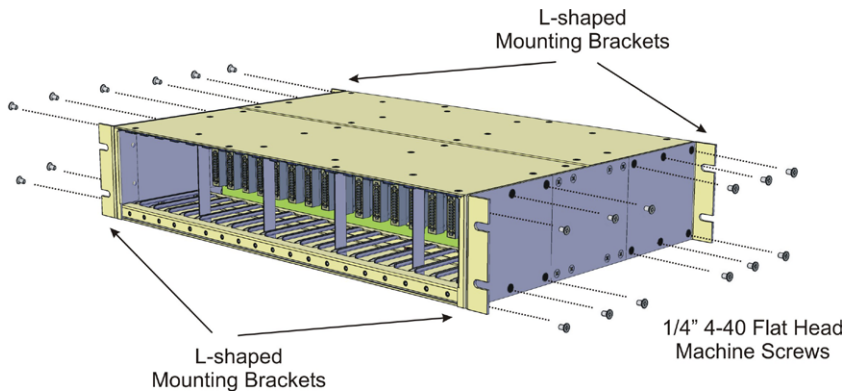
Installation of Mounting Brackets on Dual Front and Rear Loading Chassis
